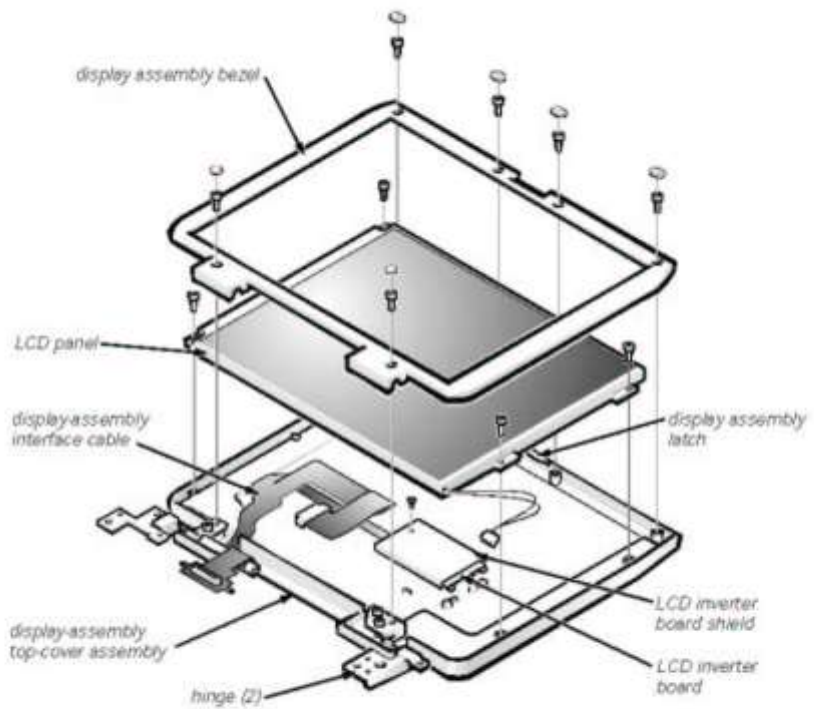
Exploded View—Display Assembly (13.3-Inch Display Shown)
